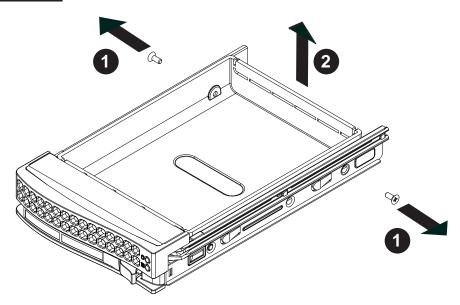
Removing the Dummy Drive from the Hard Drive Carrier
